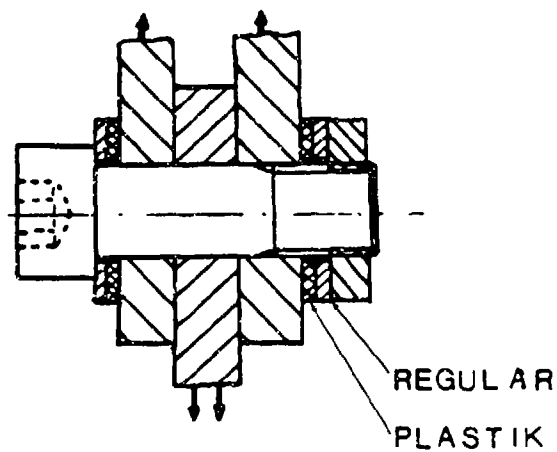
Bolt Assembly Used in Early Tests. A Standard Hex-Socket-Head was Used with Plastic Washers
